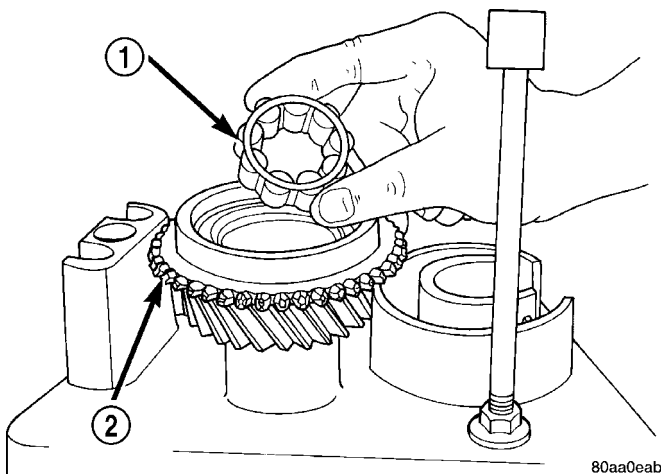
FIXTURE FOR GEARTRAIN BUILD-UP
